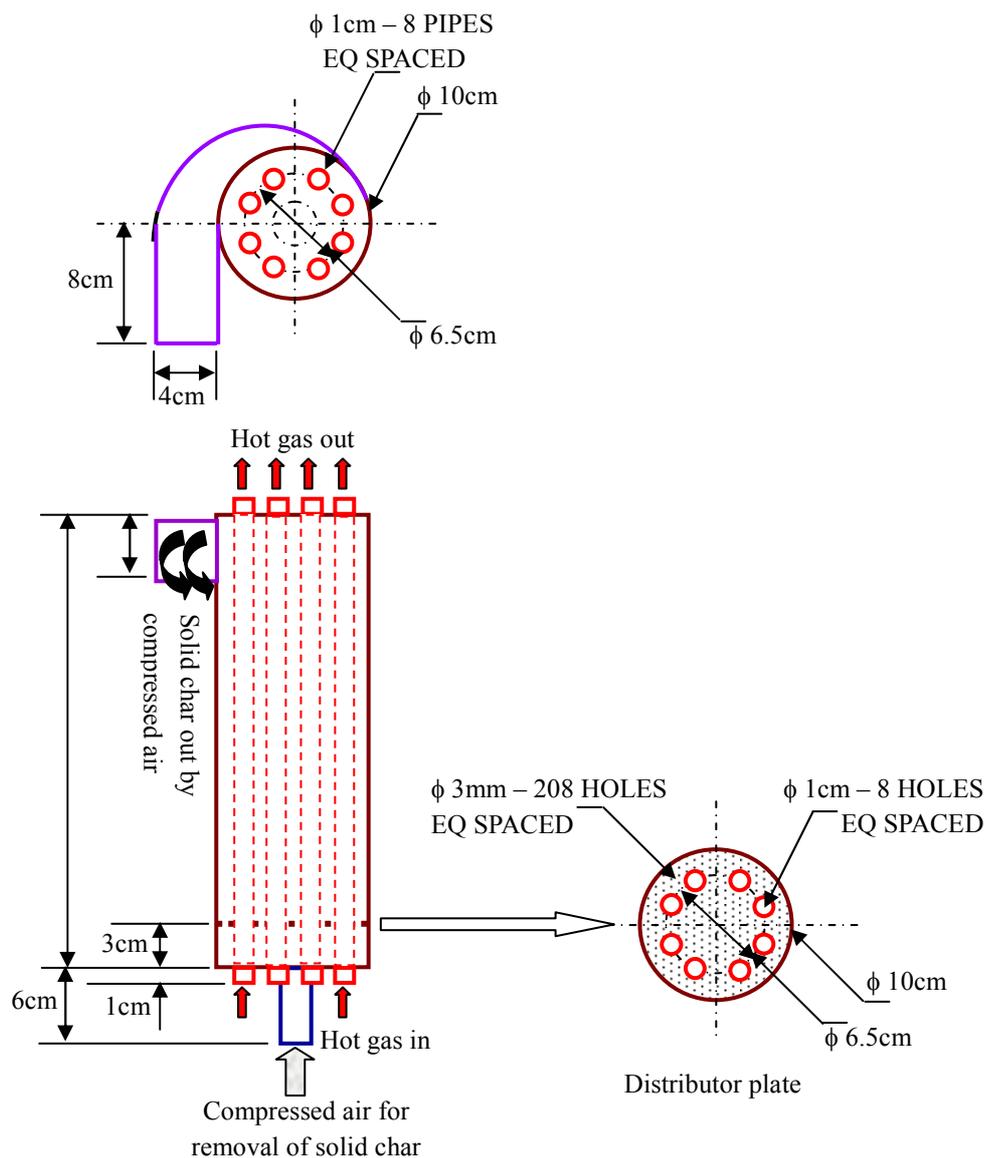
Detail drawing of the cold model of a fire-tube reactor chamber
